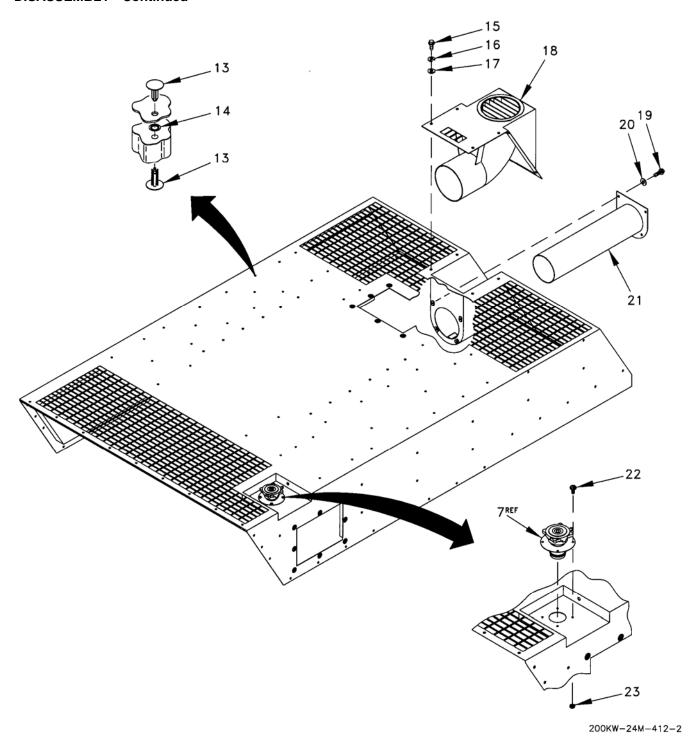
Front Roof Section Housing Assembly (Sheet 2 of 2).
